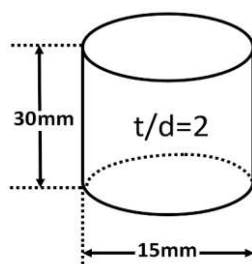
Schematic of specimen used for compression testing as per ASTM standard
